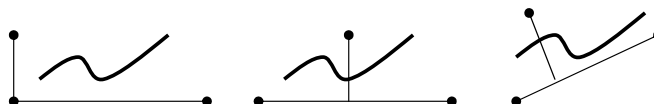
Specifying 3 Points on Workpiece Fixing Base
